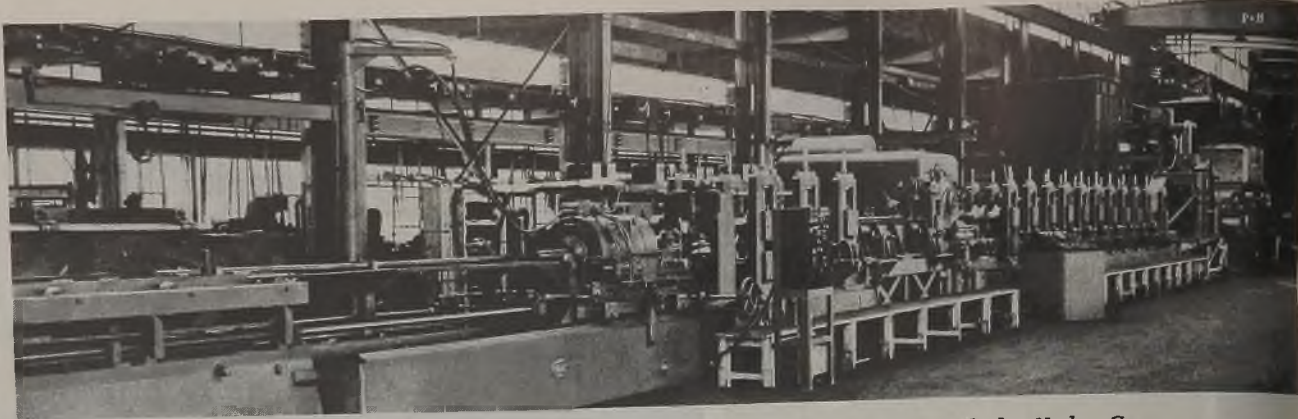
Overall view of continuous "straight-line" mill, designed and built by Yoder Co. for Russian production of resistance welded steel tubing and pipe from coils of unpickled hot rolled stock. Runout table and revolving flying cutoff machine can be seen at left, continuous welding unit and general control desk at center, and shot blast unit at far right
